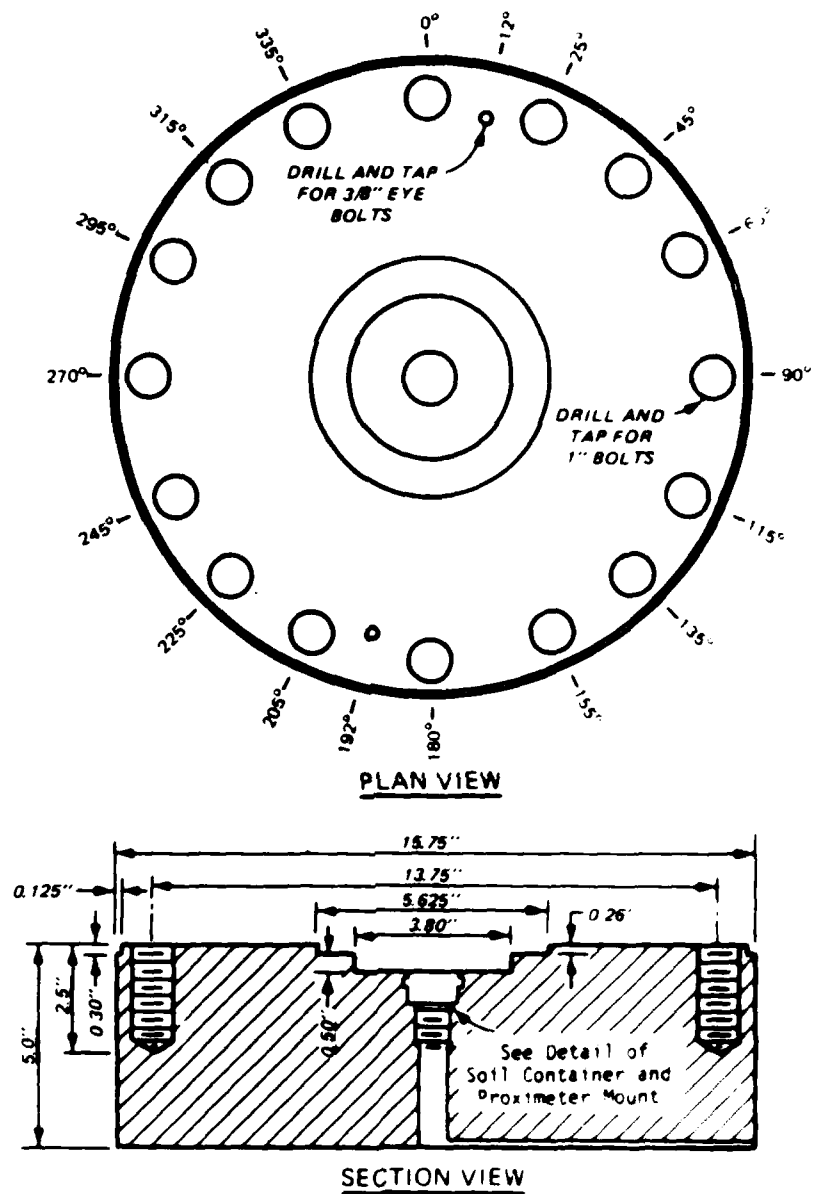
Drawing of the lower assembly of the WFS 0.1-msec device.
